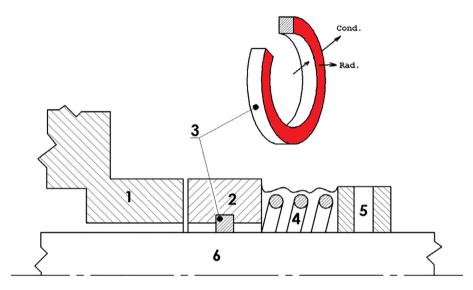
Schematic of mechanical seal: 1-Stator, 2-rotor, 3- ring, 4-spring, 5-steady pin, 6- shaft.
